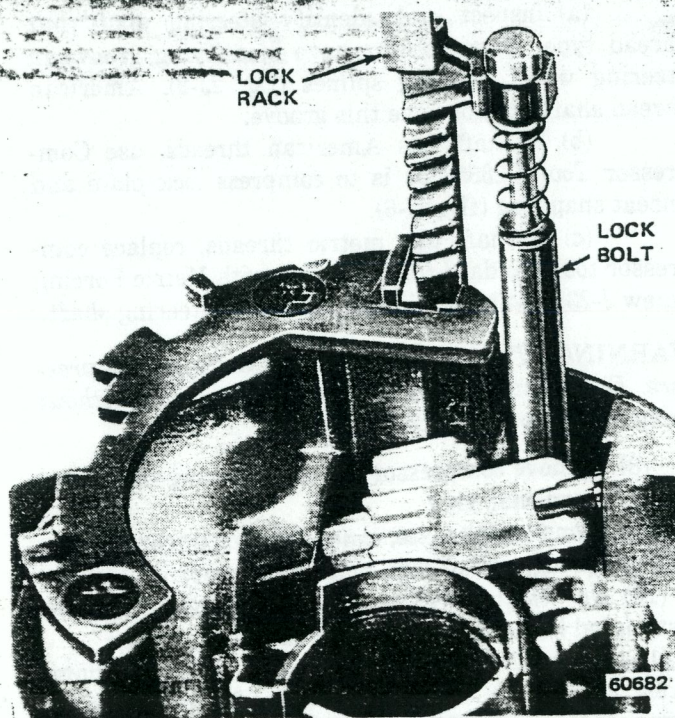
J-33 Lock Rack and Lock Bolt Installation
